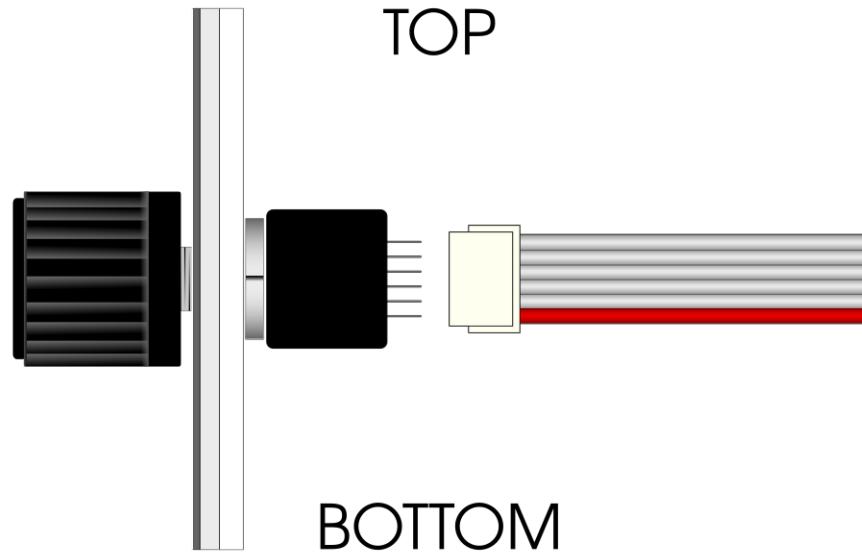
Settings Knob and Brightness Knob Cable Alignment
